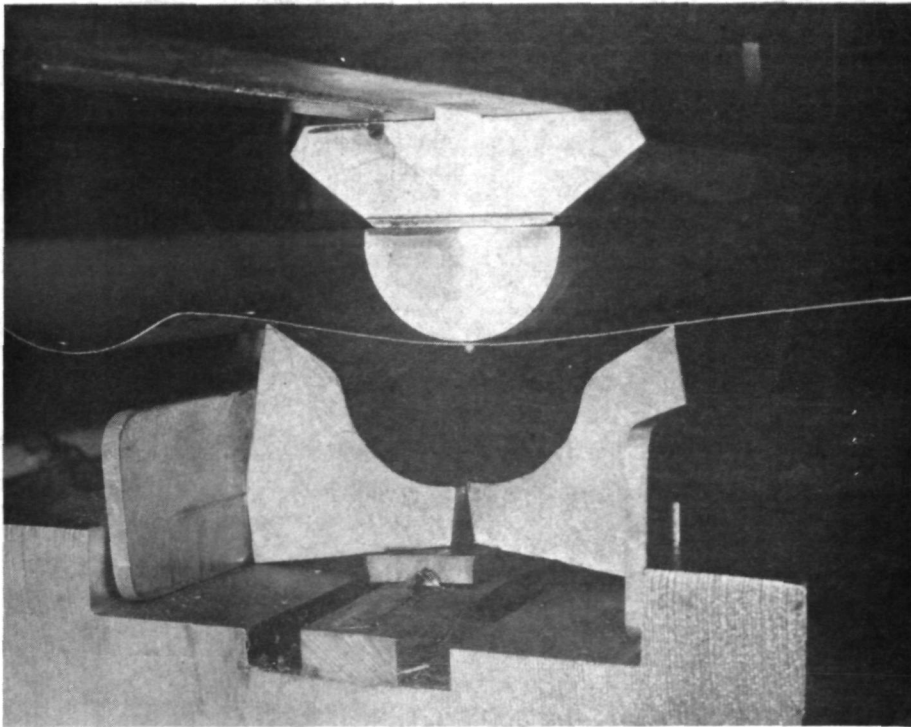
UNIFORM SECTION FORMING—BEGINNING OF STROKE
